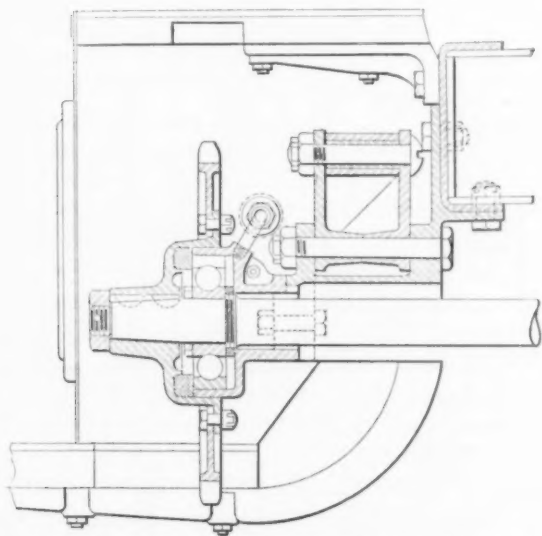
JACKSHAFT AND SPROCKET OF THE LOCOMOBILE COMPANY
